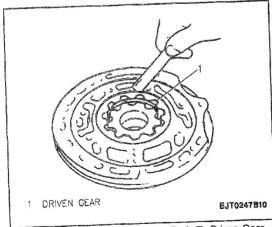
Measuring Oil Pump Body-To-Driven Gear Clearance
